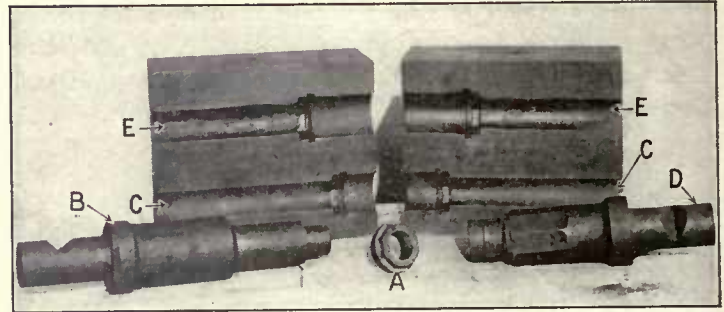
Dies and Formers for Forging Valve Seat for Air Pump.
